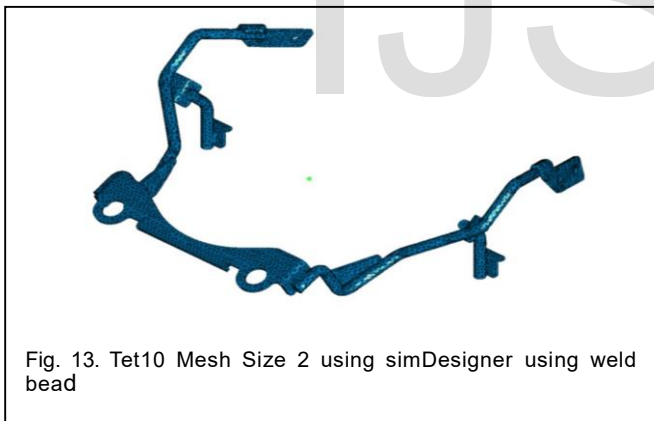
Tet10 Mesh Size 2 using simDesigner using weld bead
